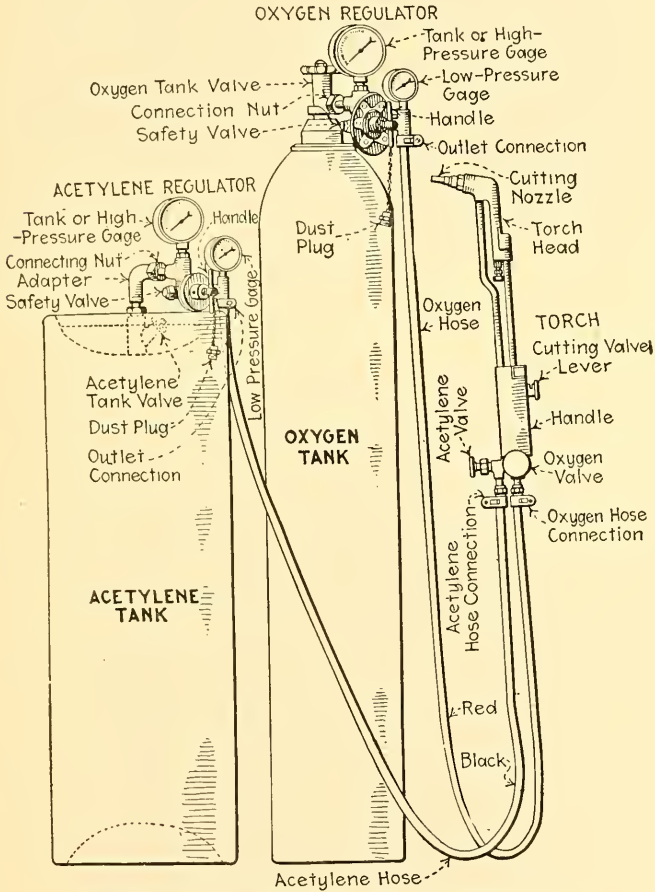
Typical Oxy-Acetylene Cutting Unit.
